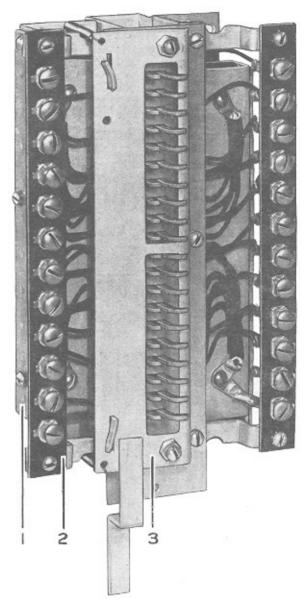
No. 11822 Coil Bank Assembly (Front View)
